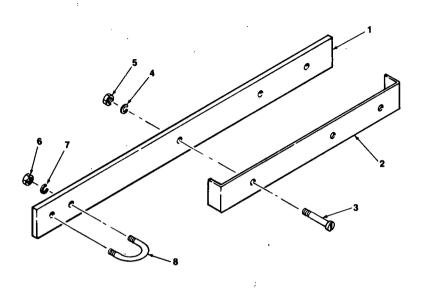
TUBE SUPPORT ASSEMBLY.
